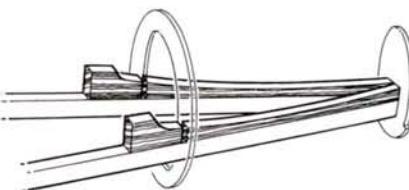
The stabilizer mounting pieces S-0 are cut out of spruce and glued to the top edge of the crutch. Notice how the mounting pieces are cut into two so that they fit fore and aft of F-12.
